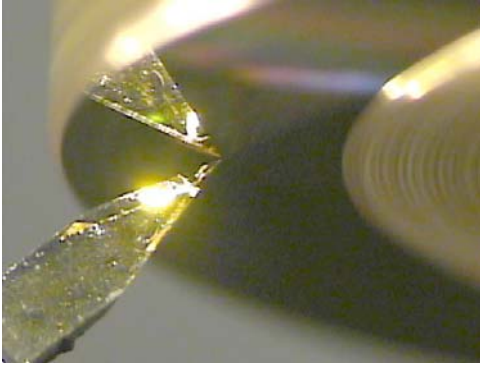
Machining of a face on a holder to obtain an axial reference position.
